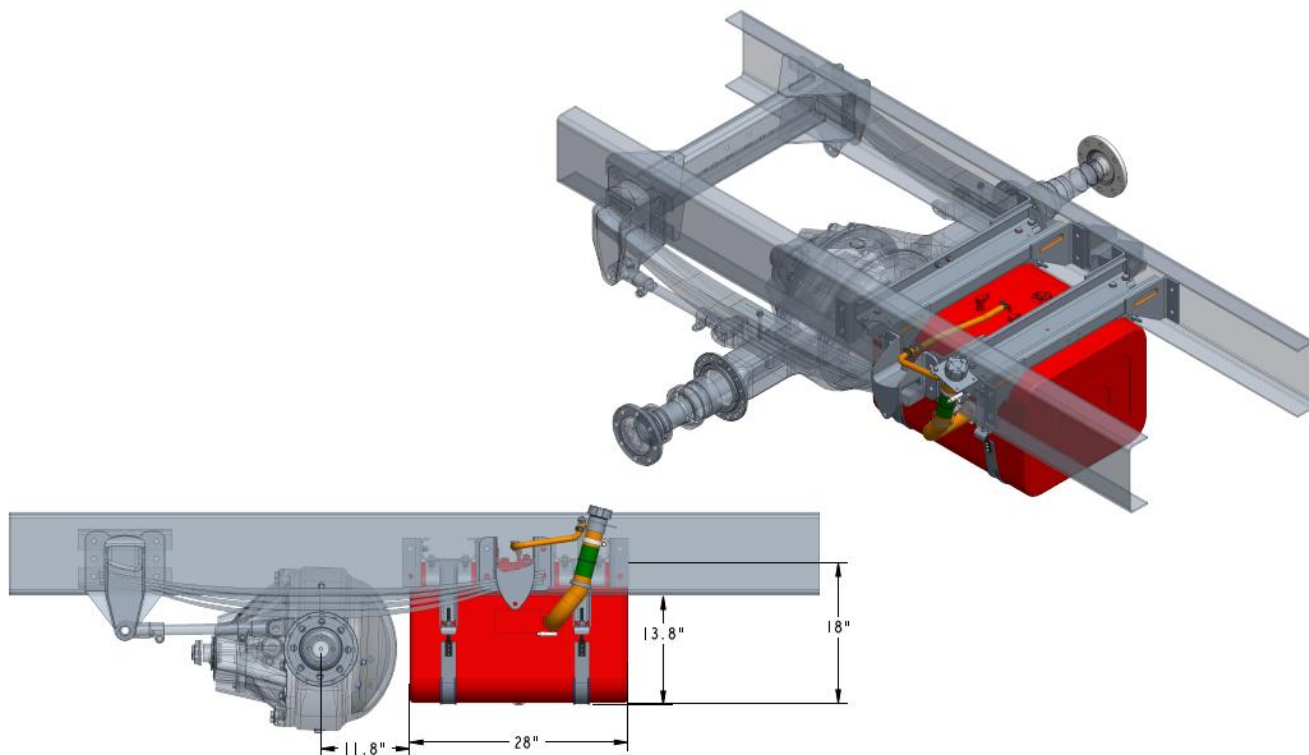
In-Frame Fuel Tank – 45 Gallon – With Dimensions
